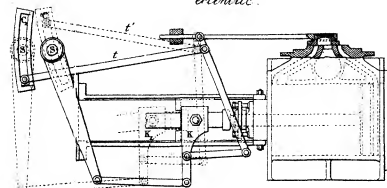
Mediterranean engine similar to 1130 forward gear.
